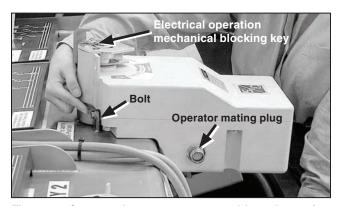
Connect the motor operator cable to the mating plug on the operator.
